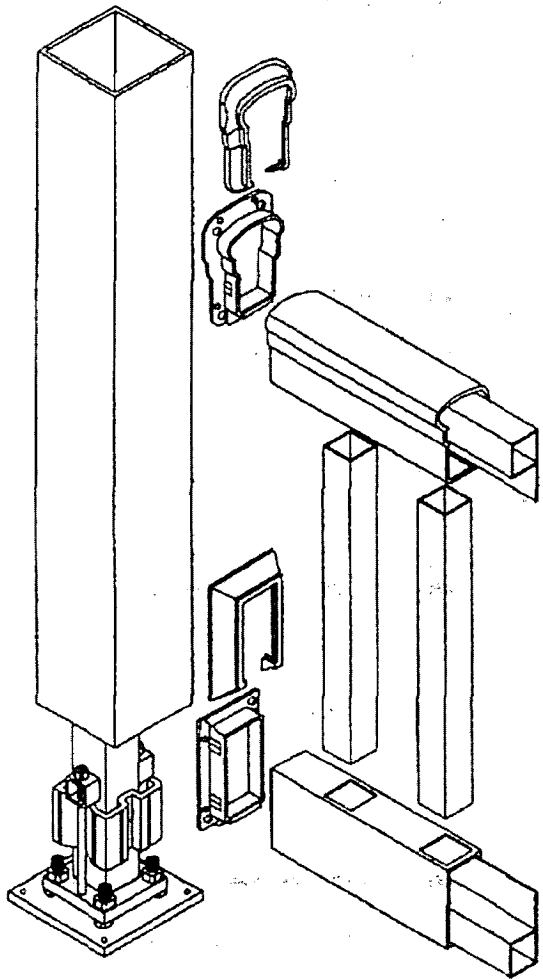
FALCON GUARDRAIL SYSTEM ASSEMBLY
